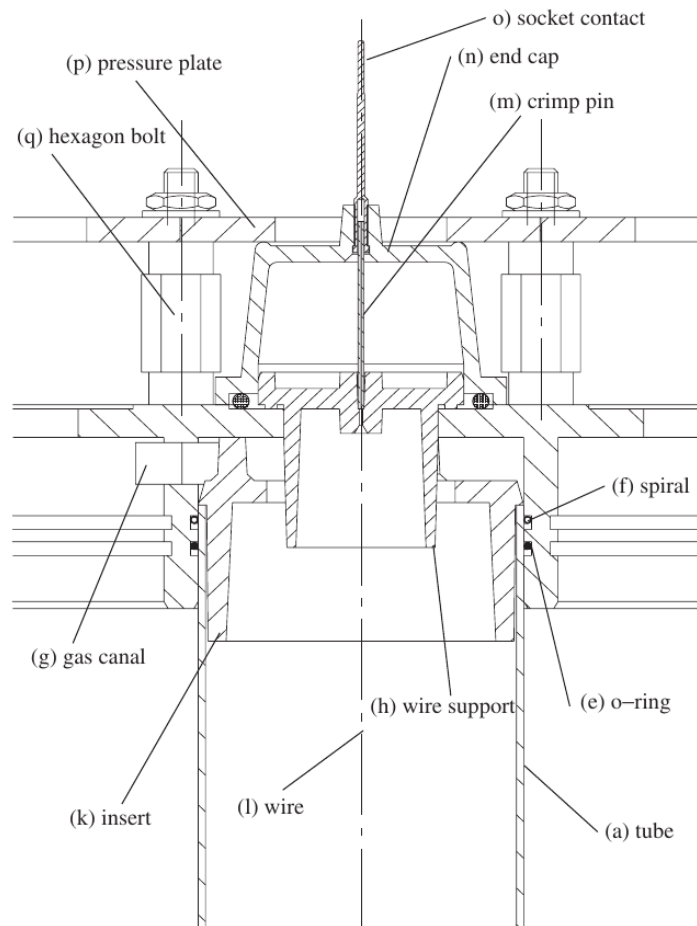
Detail drawing of the side for front end electronics of an OPERA type drift tube module [94].
